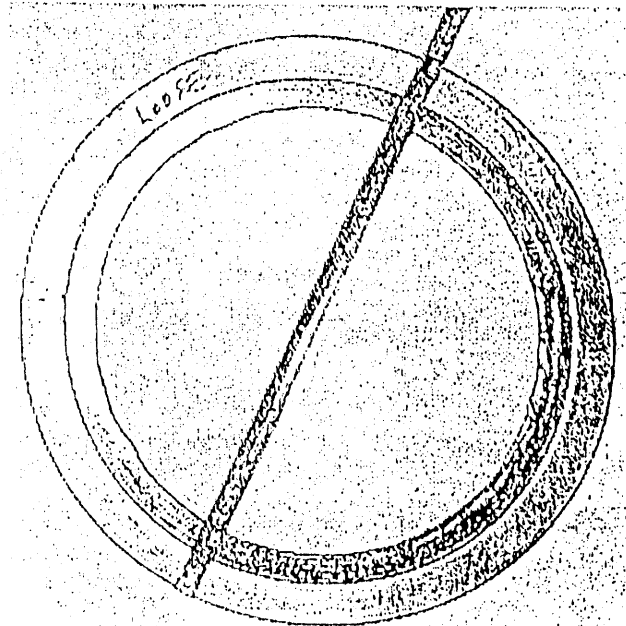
Test NPS 8 Class 300 SWFG Gasket with No Buckled Inner Spirals - Loose Outer Ring
